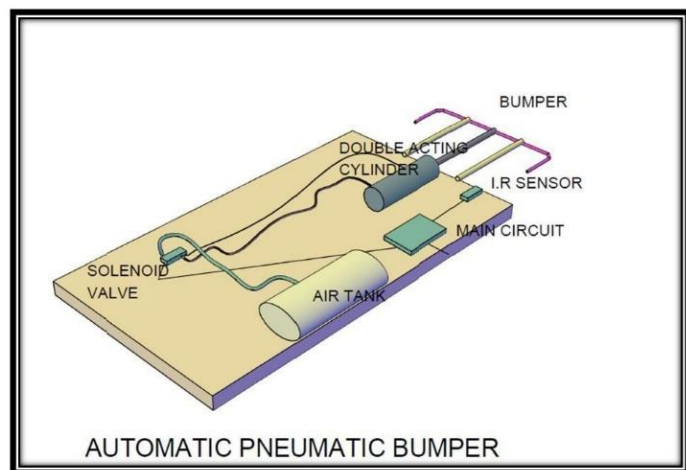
AUTOMATIC PNEUMATIC BUMPER
